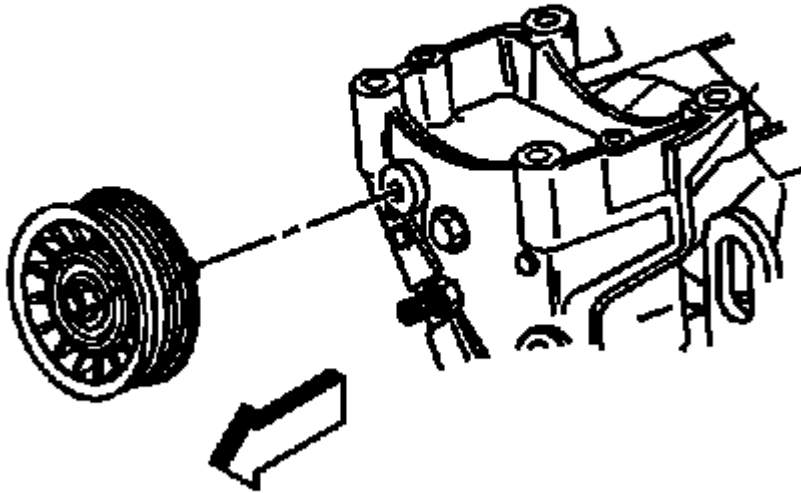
View Of Drive Belt Idler Pulley (W/O Air Conditioning)
